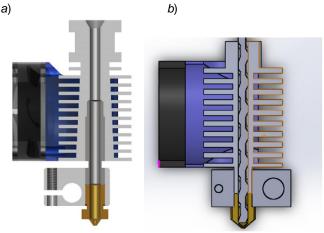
Cross-section of the print head: E3D v6 (a); head construction concept (b)
